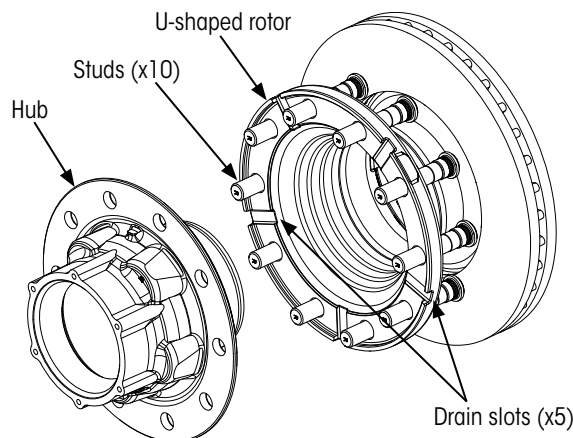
Hendrickson stud mounted hub & U-shaped rotor assembly
